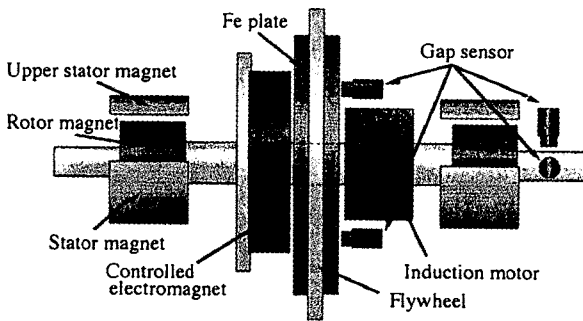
Bearing system configuration. (Horizontal shaft type)
